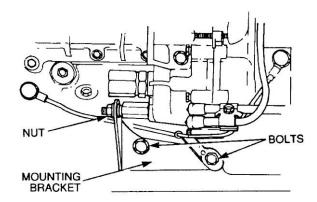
Installing the Injection Pump Rear Mounting Bracket
